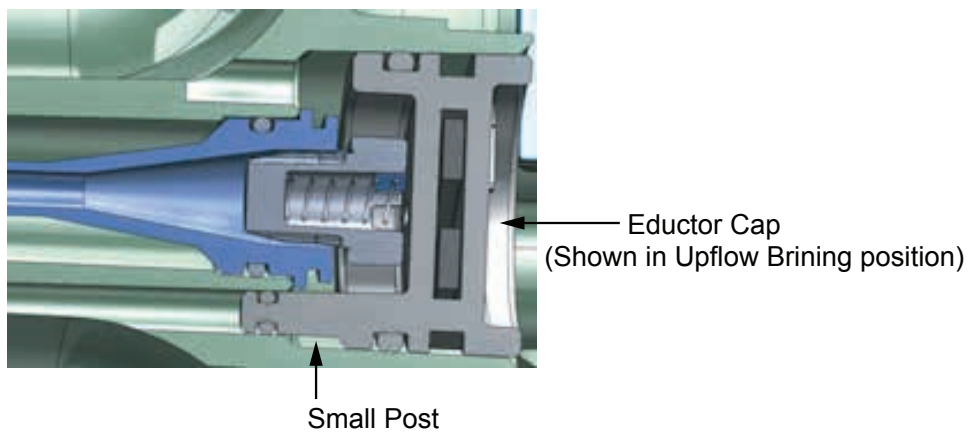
Smart HE Upflow Eductor Assembly - Cross Sectional View
